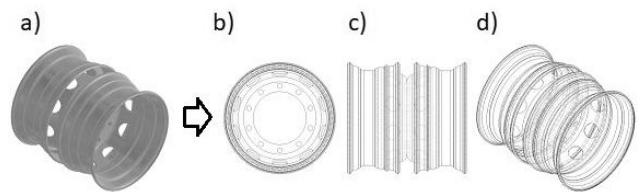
The model comprised two rims of the twin rear wheels of the rear axis of the tipper: a) general view; b) and c) wireframe style perpendicular views; d) wireframe style isometric view
